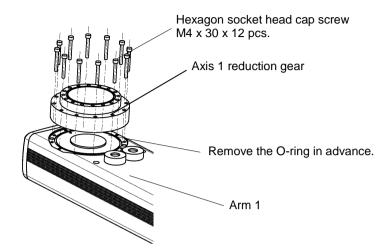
Dismounting axis 1 reduction gear (KHL-500, KHL-600, KHL-700)
